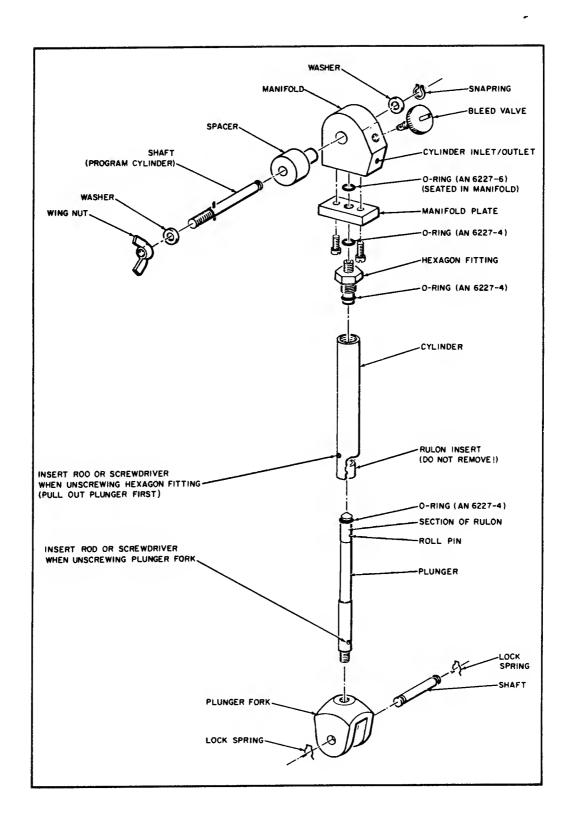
Exploded view drawing of cylinder and plunger shown in Exhibit 4.
